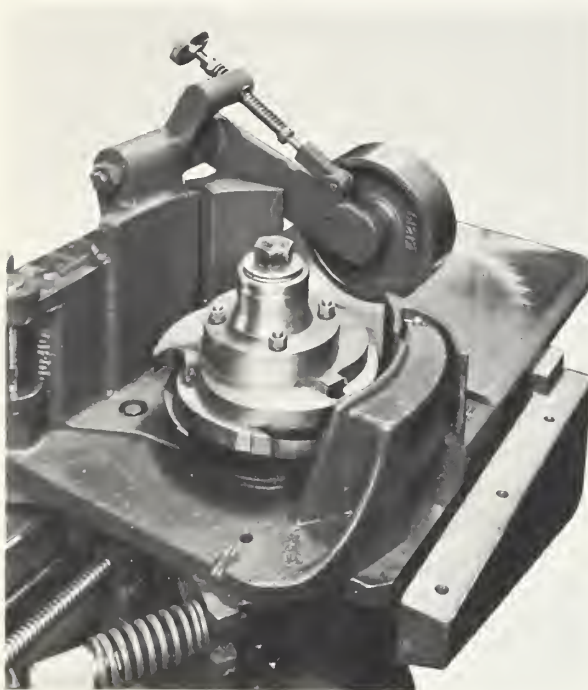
Chip-blanking, climb-milling cutterhead on outer side-head of planer and matcher (Koch, 1964b, p. 304).
